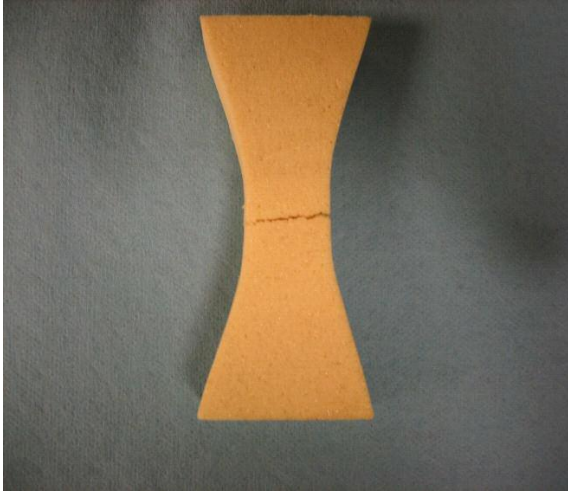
Photograph of the fractured surface after being compressed 100 cycles.
